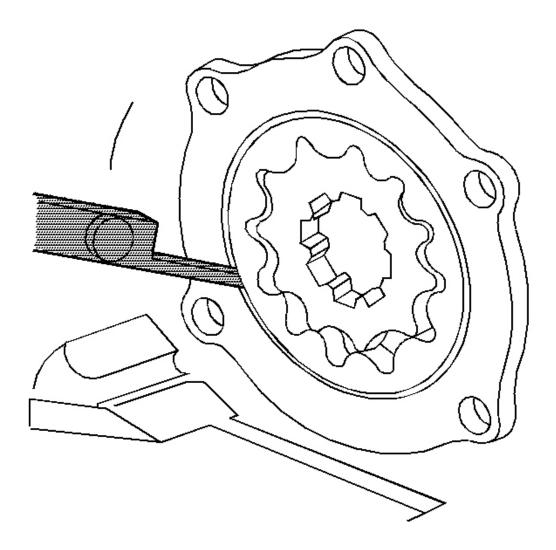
Measuring Outer Oil Pump Gear Tip Clearance Courtesy of GENERAL MOTORS CORP.
